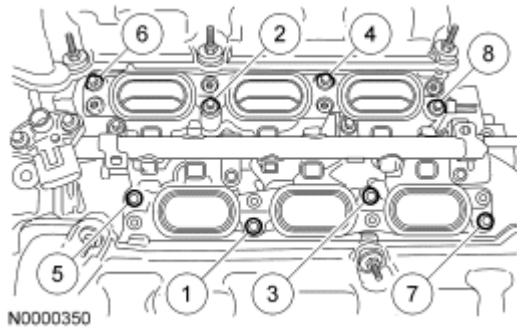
Identifying Tightening Sequence Of Lower Intake Manifold Bolts
